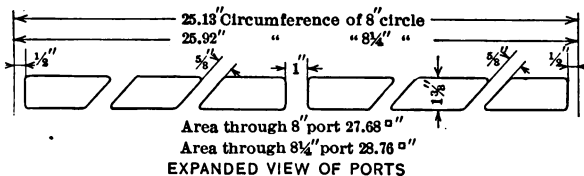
PRACTICAL LAYOUT FOR PISTON VALVE
